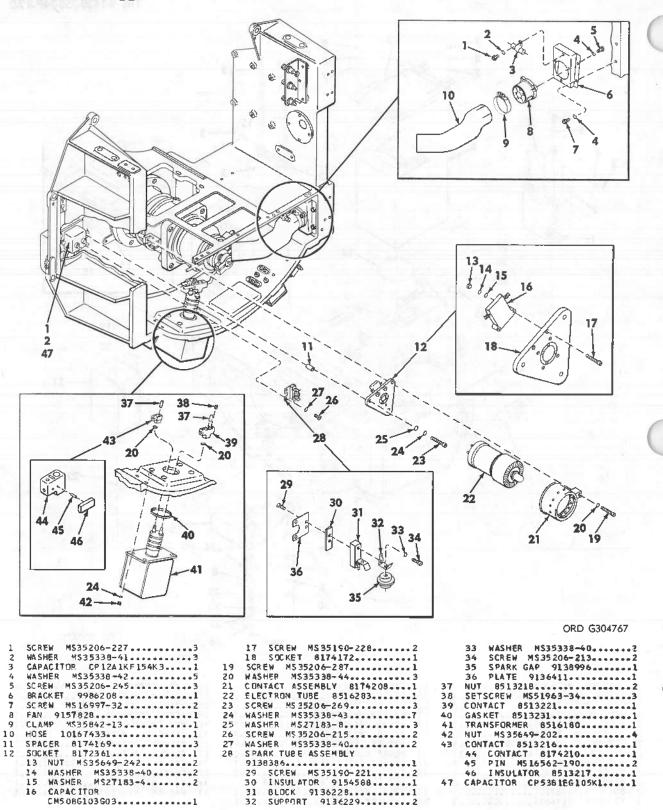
MODULATOR /8172445/-PARTIAL EXPLODED VIEW
